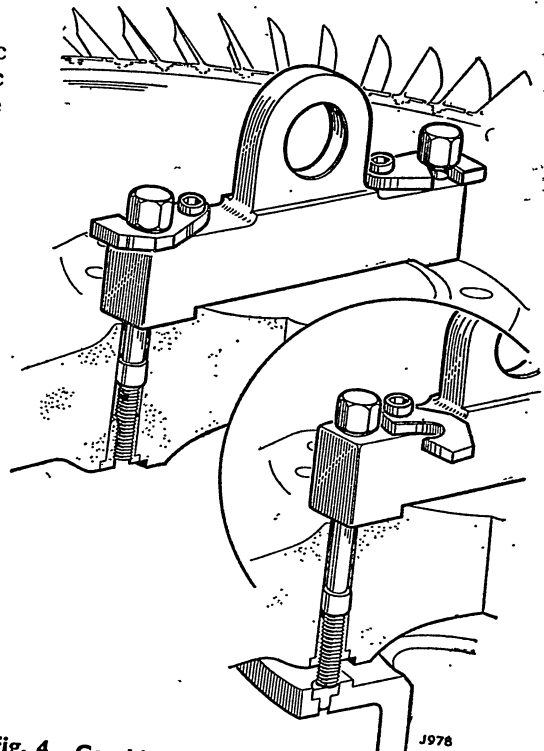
Combined extractor and lifting fixture T70186 arranged for lifting purposes and (inset) the extractor bolts being used to release the turbine disc from the hub shaft
